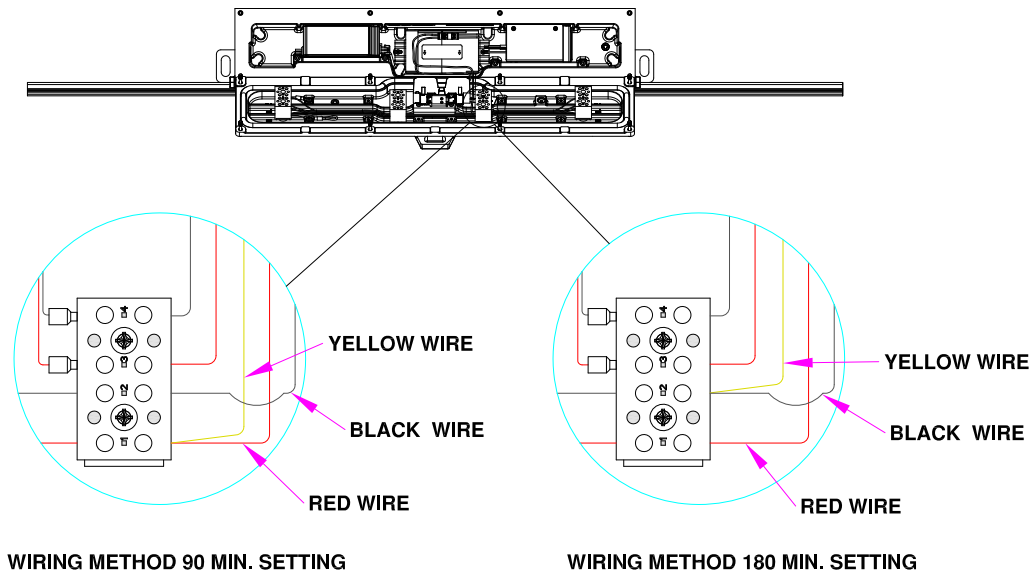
WIRING METHOD FOR DURATION SETTING
